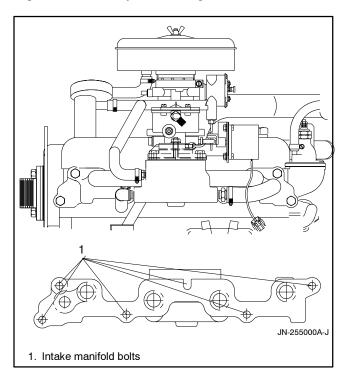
Intake Manifold Bolts, 10/12 kW
